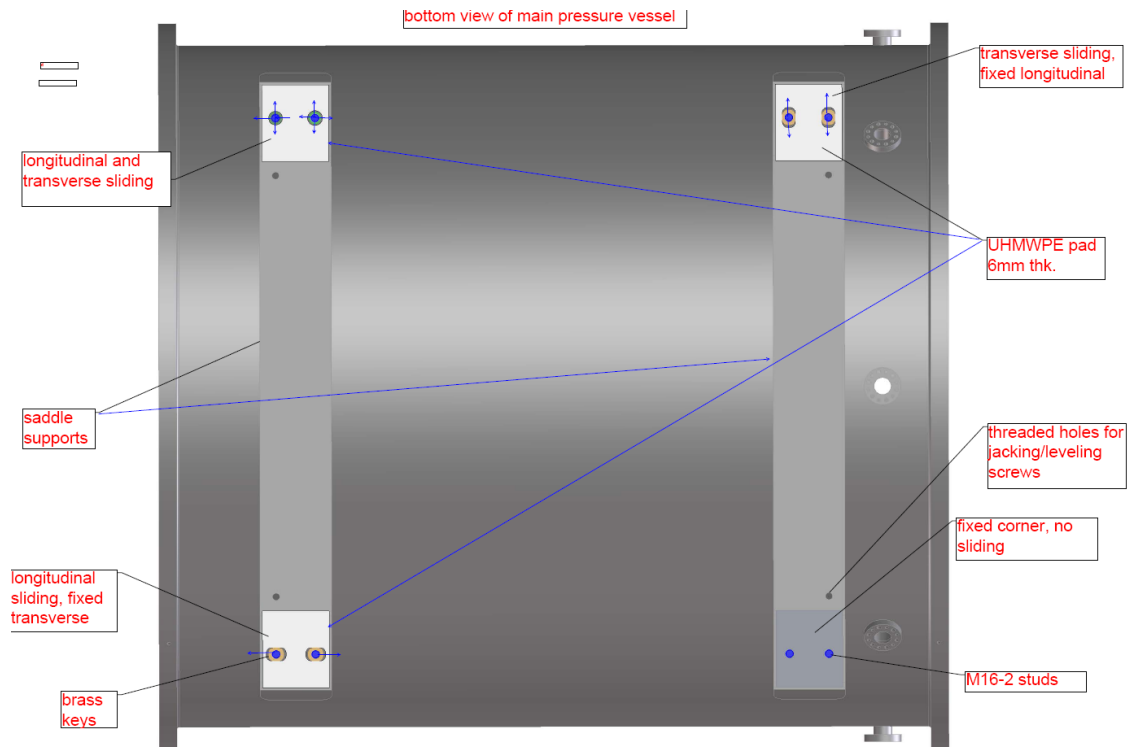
Vessel (quasi) Kinematic Support design, bottom view
